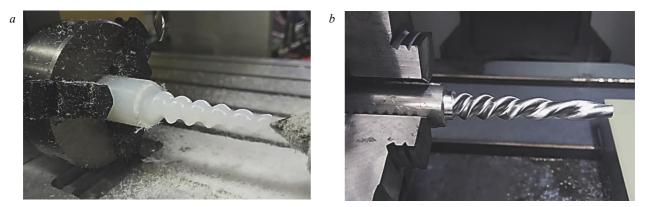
Examples of machined surfaces: a – geometry with a high degree of compression, polypropylene; b – geometry with an oval cross section, D16T
